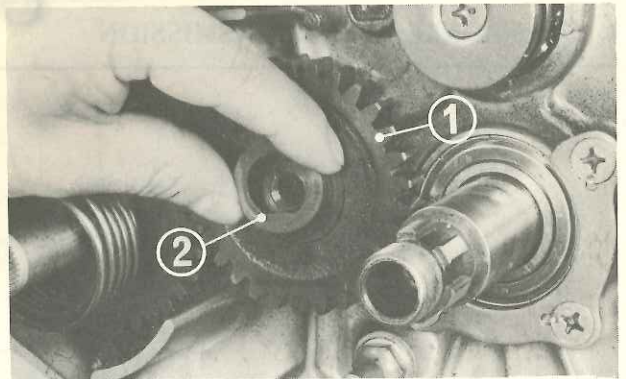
(1) Idle gear (2) 17mm thrust washer
